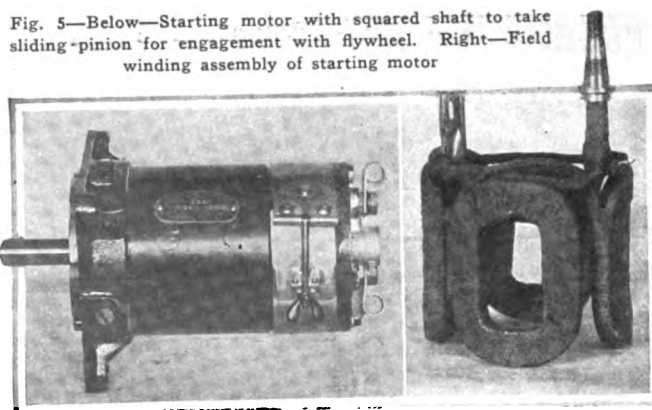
Below—Starting motor with squared shaft to take sliding pinion for engagement with flywheel. Right—Field winding assembly of starting motor
